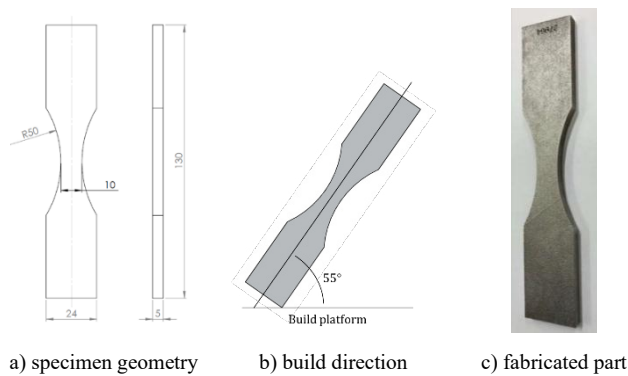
Definition and fabrication approach of fatigue test specimen.
